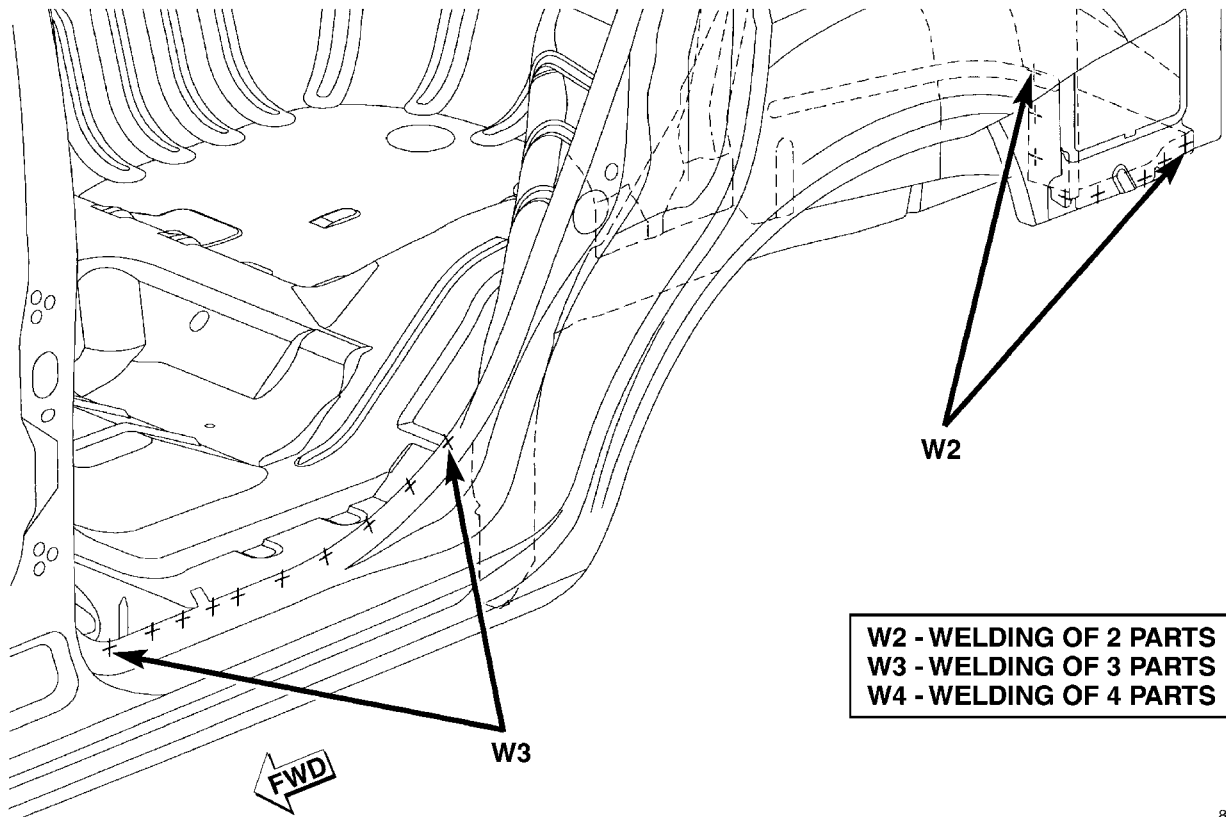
INNER AND OUTER BODY SIDE APERTURE TO SILL AND FLOOR PAN
